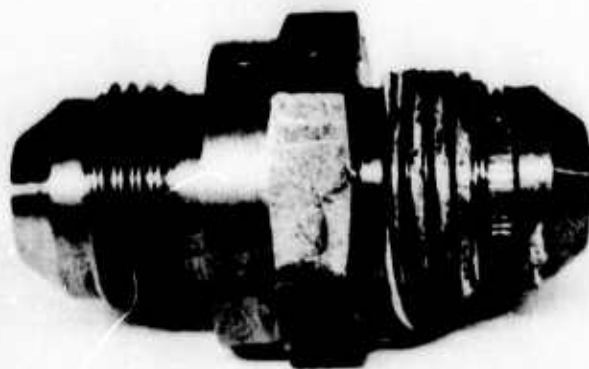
View of S.S.-1/2 Valve After Static Bending Test.
